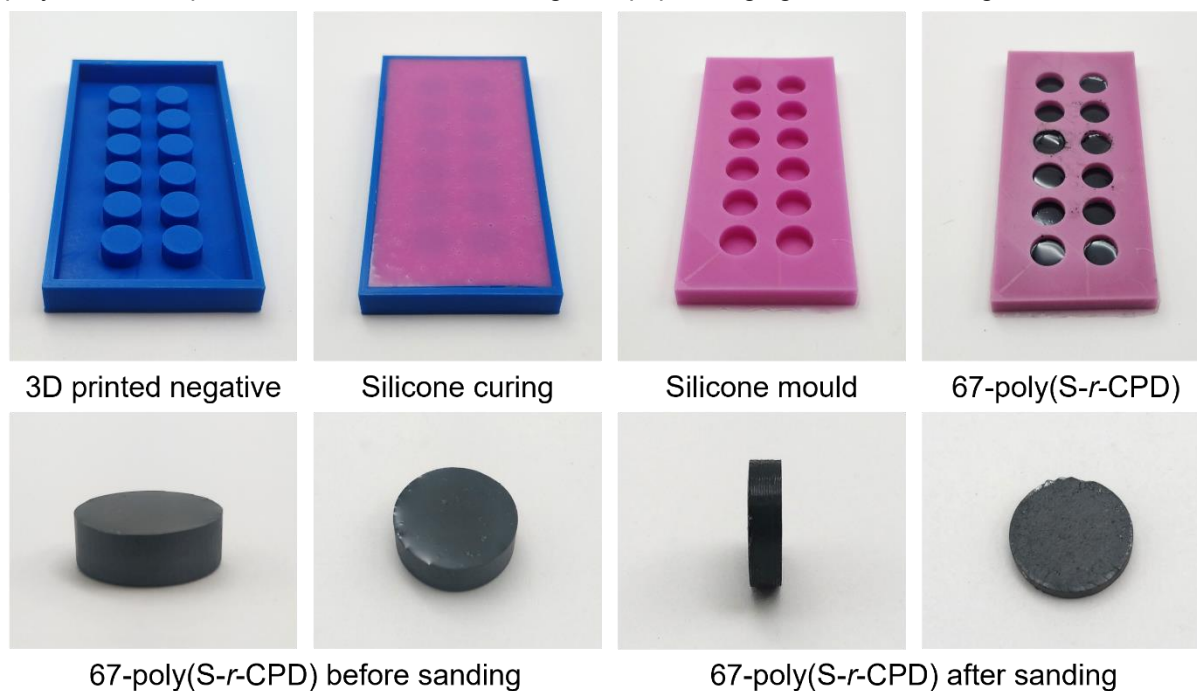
Images showing the mould fabrication and sample preparation to make 67-poly(S-*r*-CPD) for thermal expansion testing.
